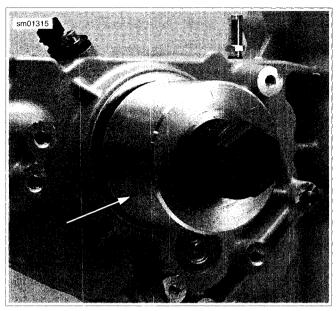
Place Installer over Adapter (typical, XL model shown)
